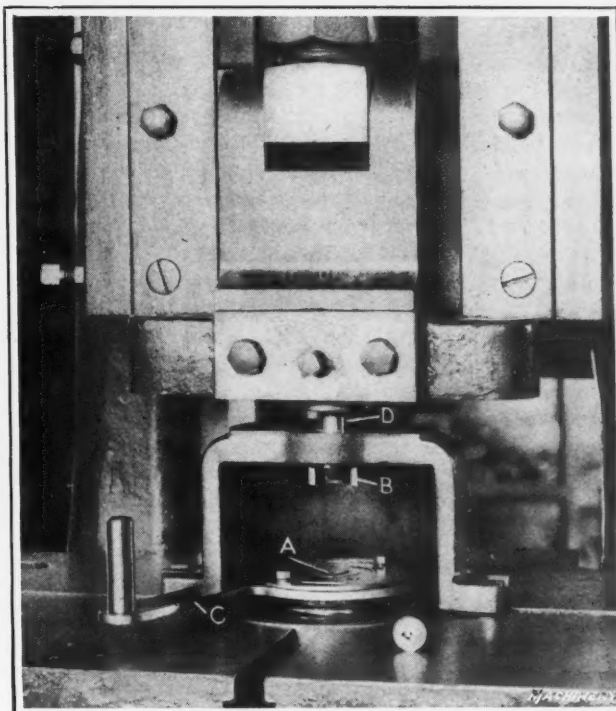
Clamping Fixture in which the Operating Screws are held while broaching the Wrench Hole
